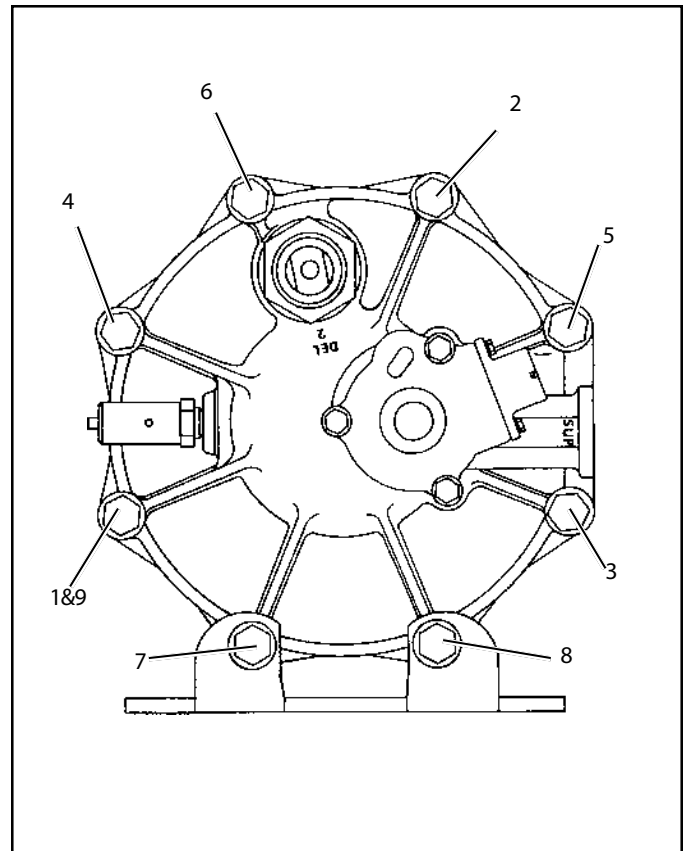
END COVER TO HOUSING TORQUE PATTERN INSTALLATION
